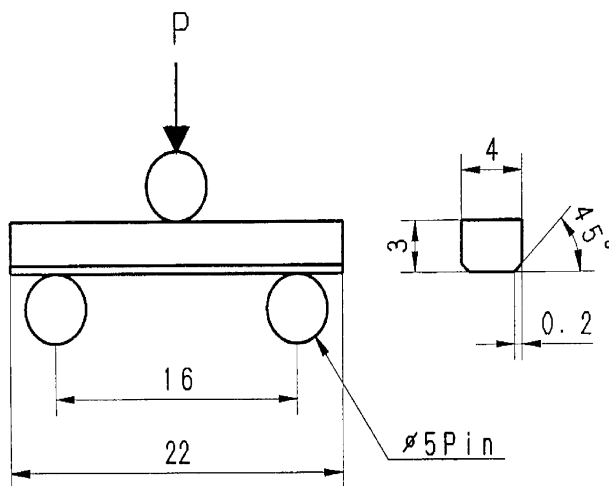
Three-point loading system and geometry of test specimen; dimensions in mm.
